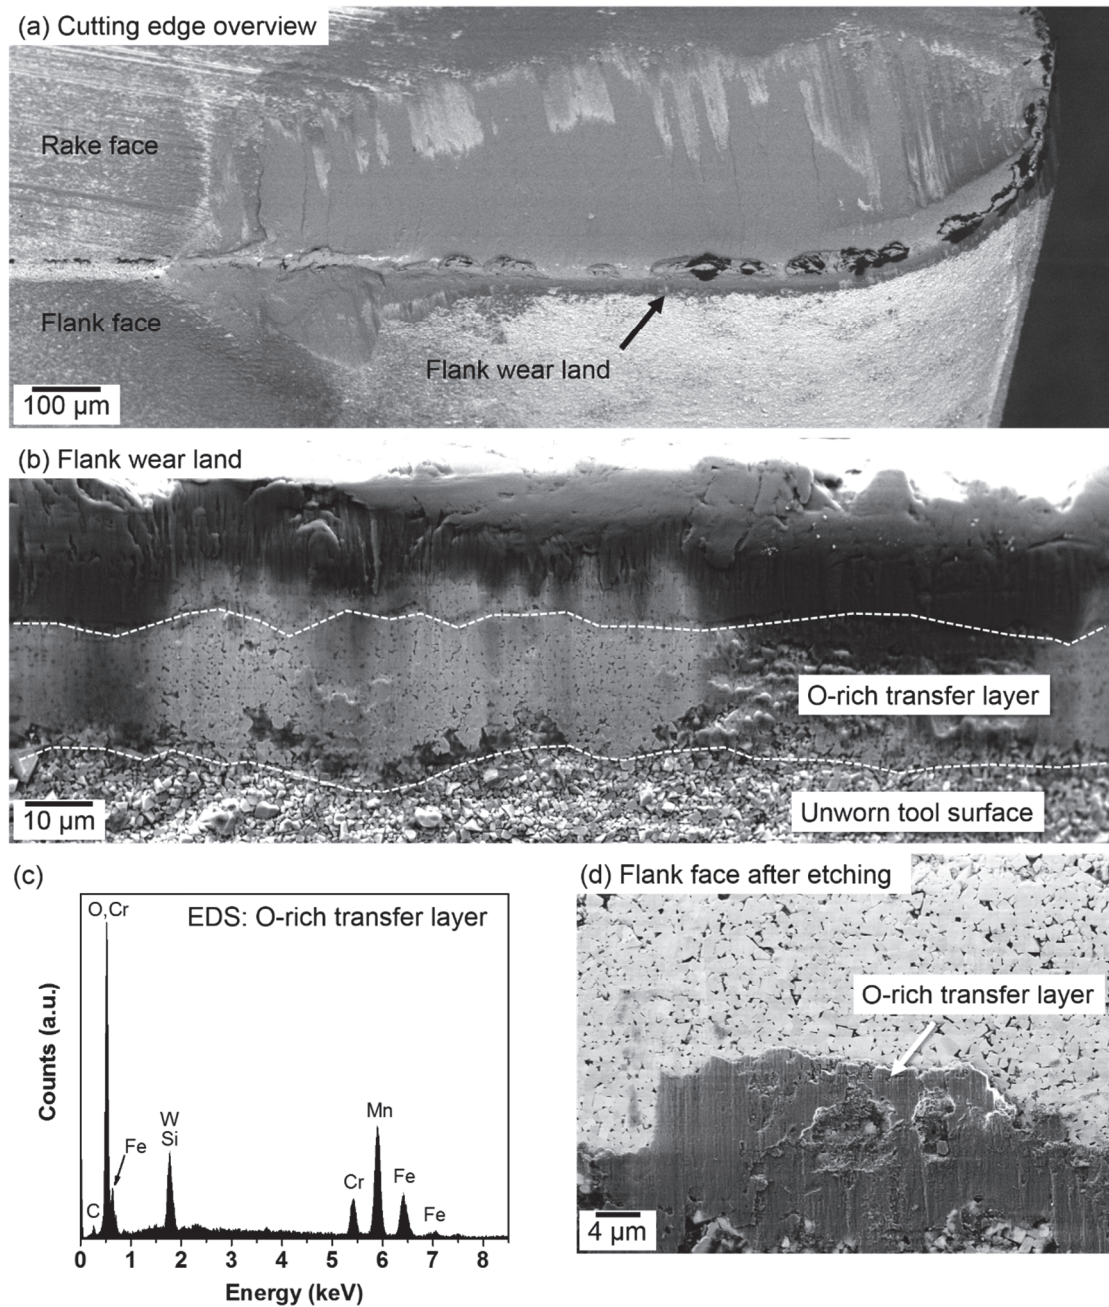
Worn cutting tool after machining the 316L workpiece from supplier B using 160 m/min cutting speed. (a) overview micrograph; (b) closer view of flank wear land with partly electron-transparent transfer layer using 20 keV acceleration voltage; (c) EDS spectrum obtained on O-rich adhesion layer; (d) micrograph (5 keV acceleration voltage) of same tool after removal of adhered workpiece material.
